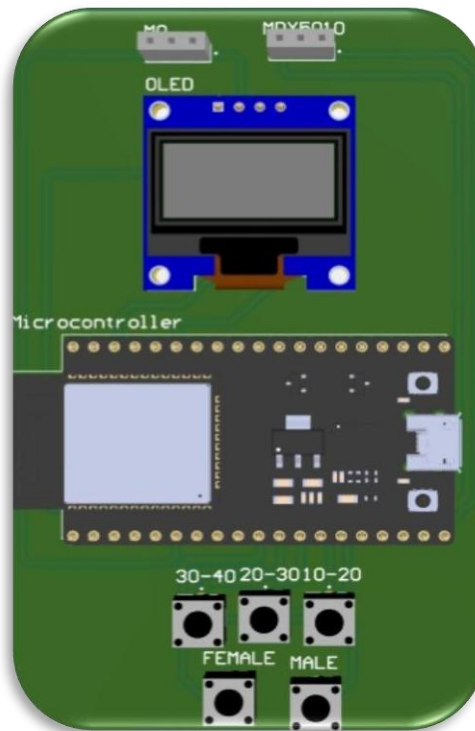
Printed Circuit Board (PCB) of Spirometer (Altium)
